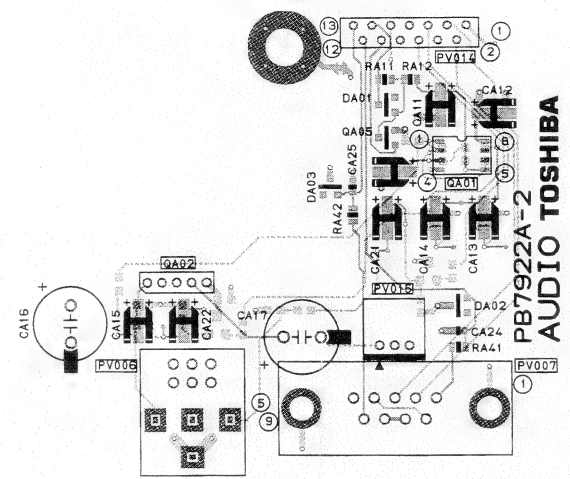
U0032 Audio PC Board (Top Side)
